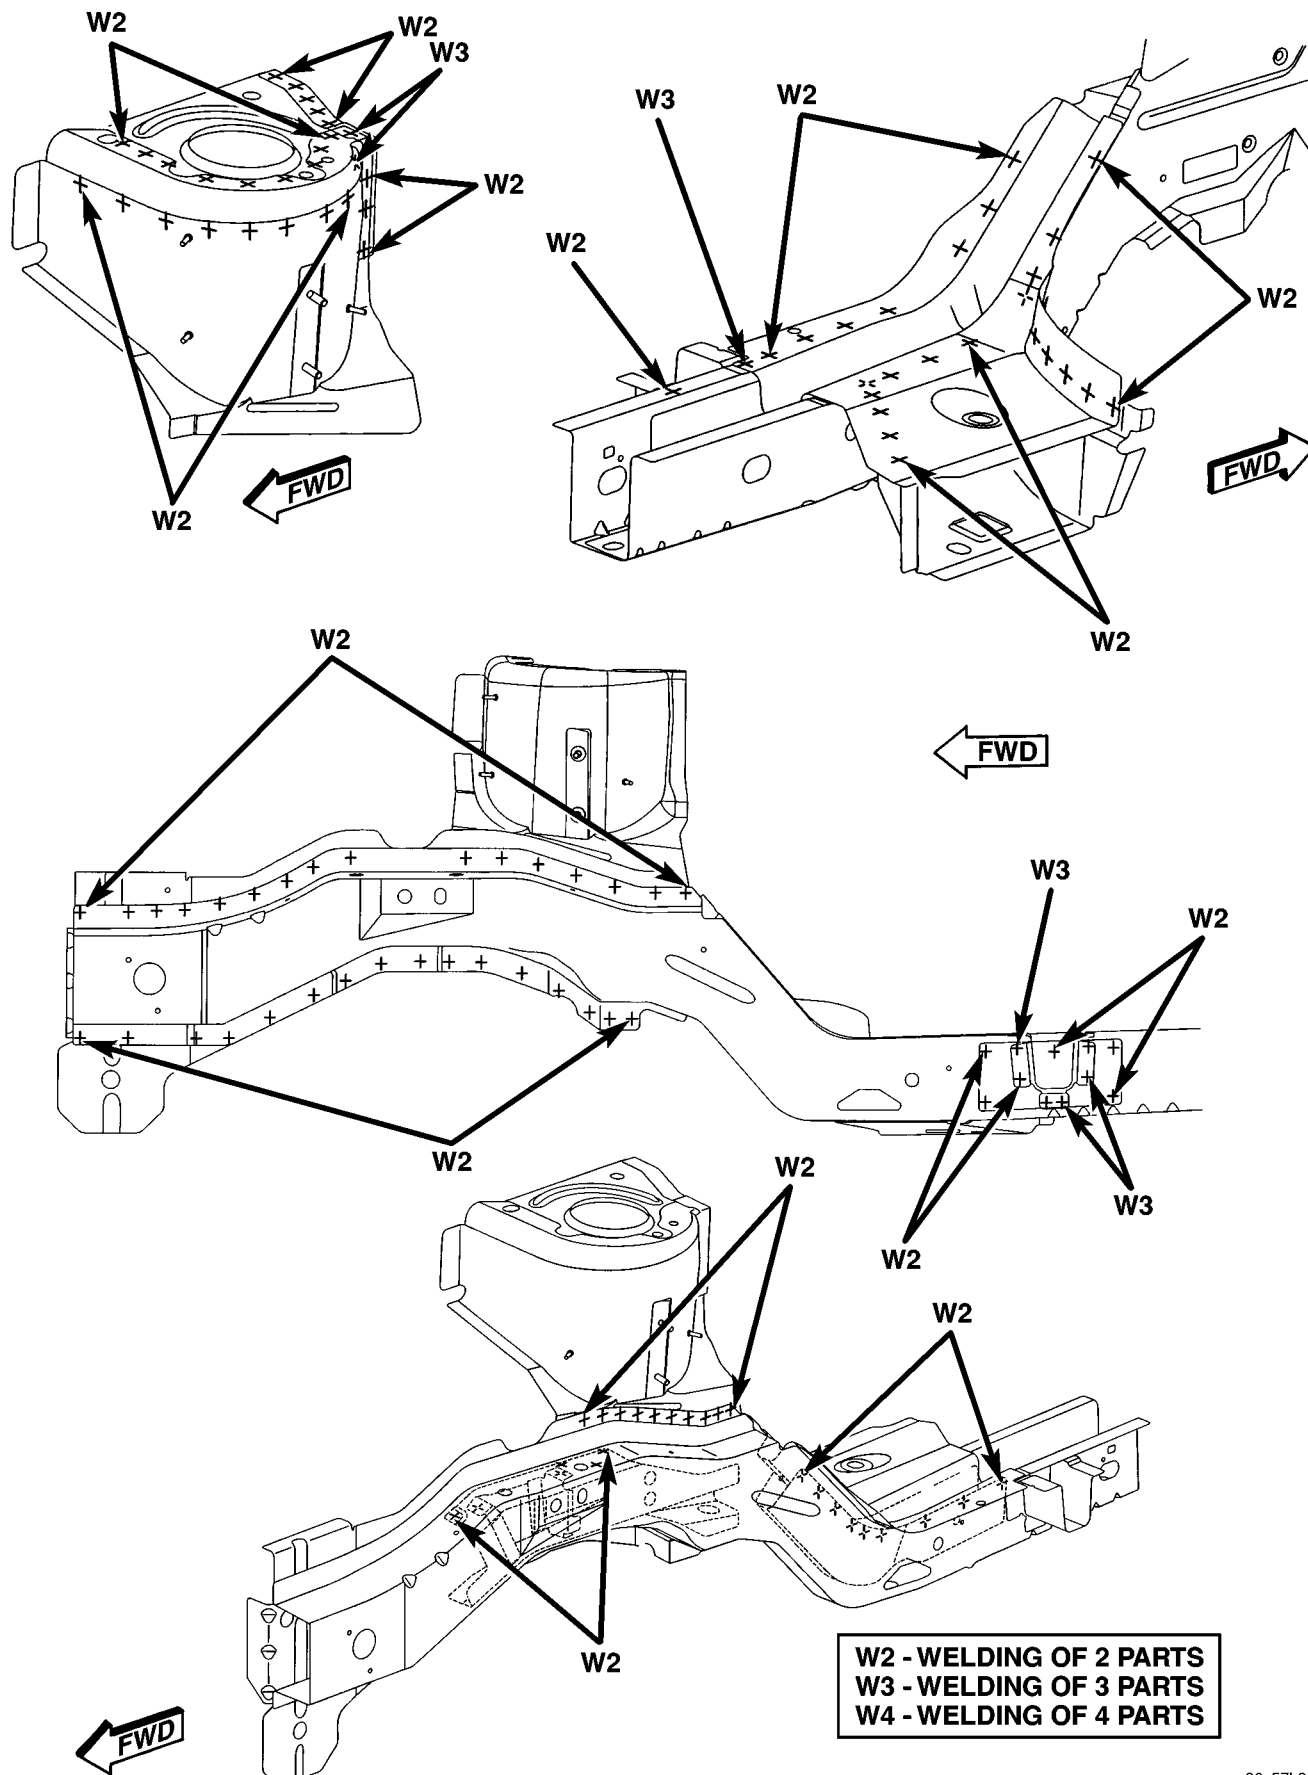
STRUT TOWER AND REINFORCEMENTS - RIGHT
